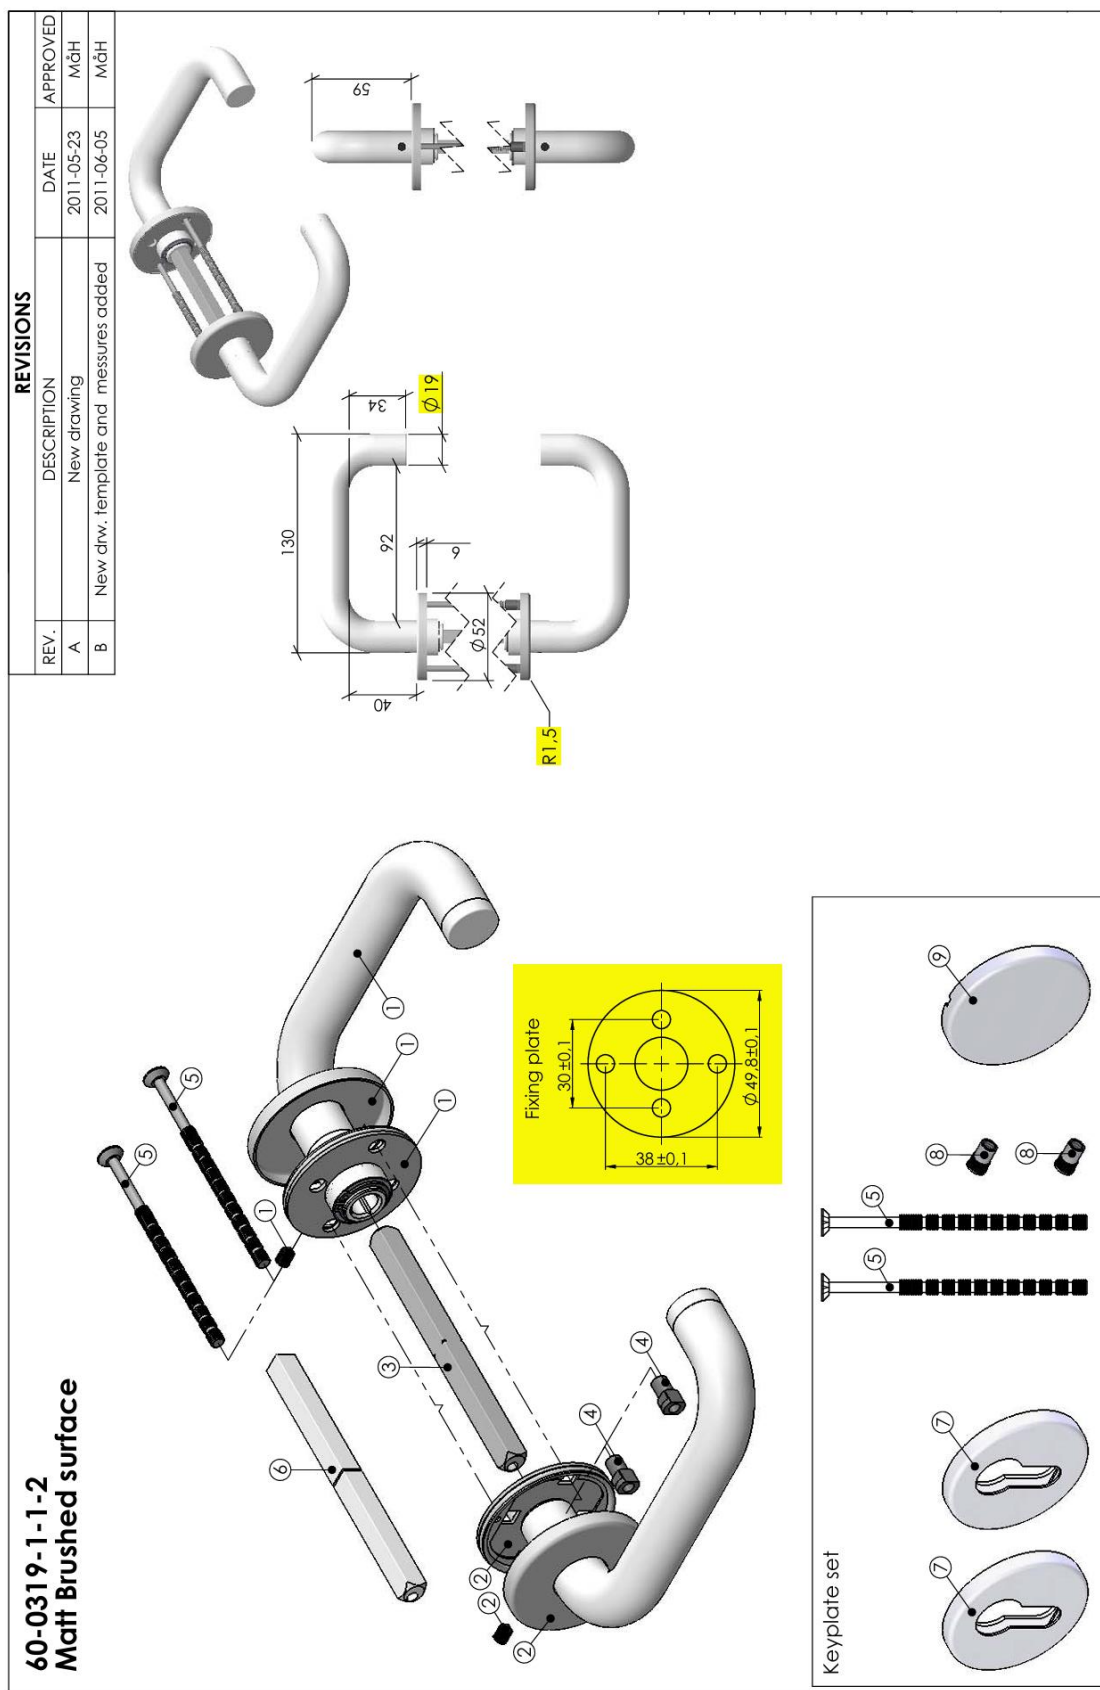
Manufacturer drawing of item 20 Lever Handle 2
